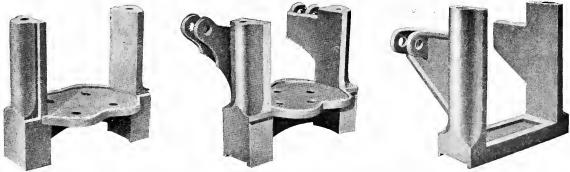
Cast Steel Combined Column or Bolster Guides and Spring Seats for Arch Bar Trucks.
